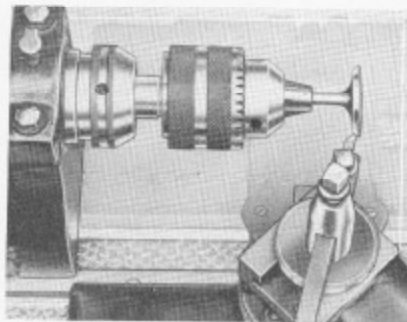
Holding a Model "A" Ford new type valve with large End on Stem
